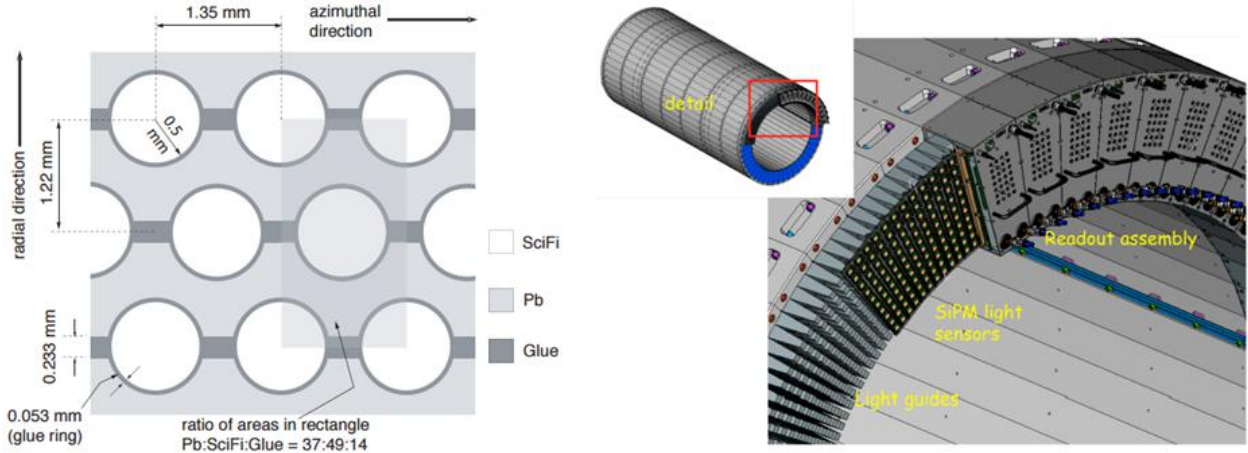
(left) lead and scintillator layer matrix (right) CAD drawing of the BCAL readout system
